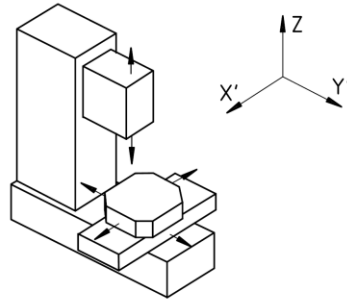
Kinematic (schematic) of the first machine tool under investigation
